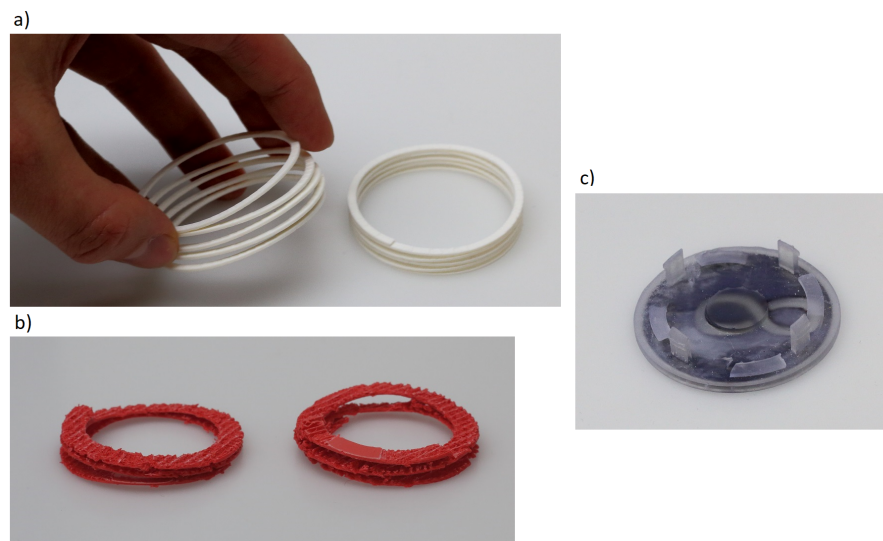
a) loose wave springs printed on FDM ABS-M30, b) wave springs printed on Ultimaker 3, 0.06 mm layer thickness, and flexible PLA, and c) a translucent faceplate with a broken spring element due to material brittleness.
